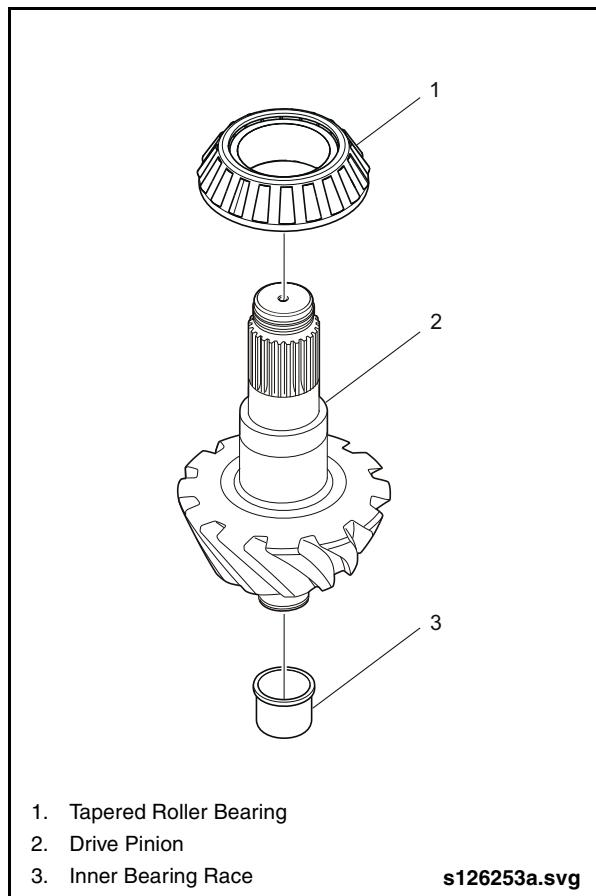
Mounting Inner Tapered Roller Bearing & Inner Race
